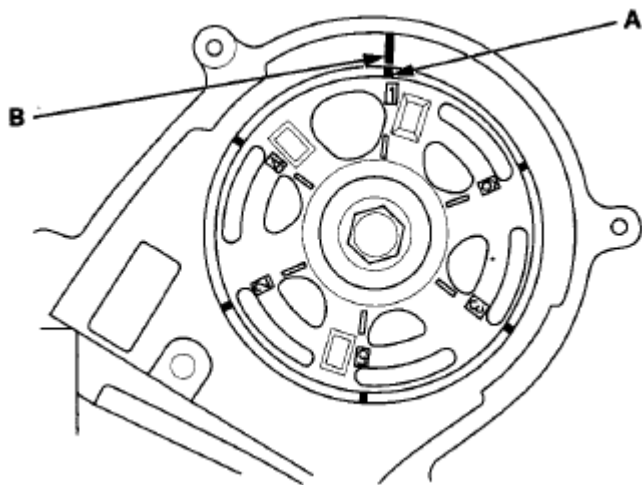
Setting Camshaft Pulleys To TDC - Front
